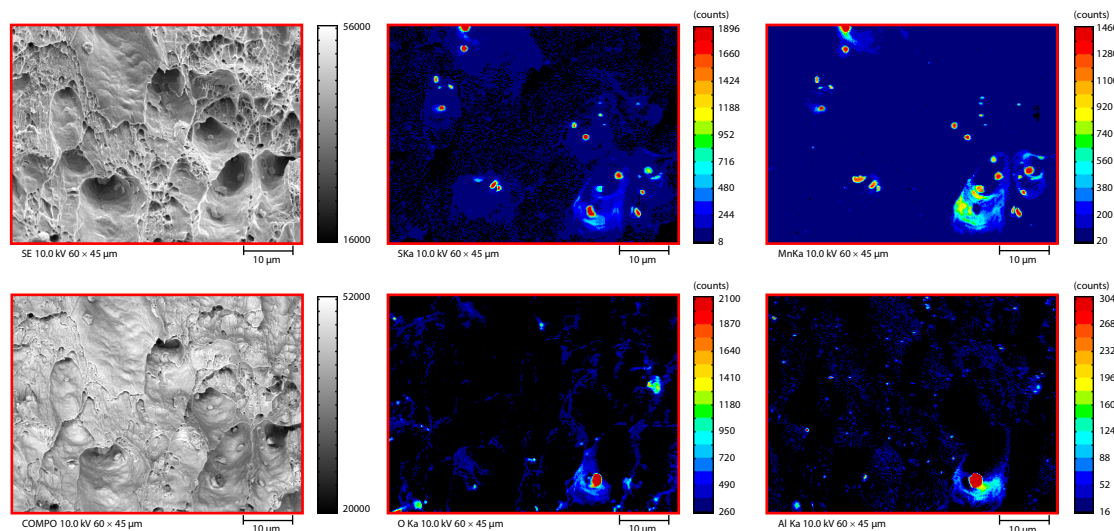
Elemental Mapping Image of Fracture Surface after High-Speed Tensile Test (Radial Forging 100 /s)
